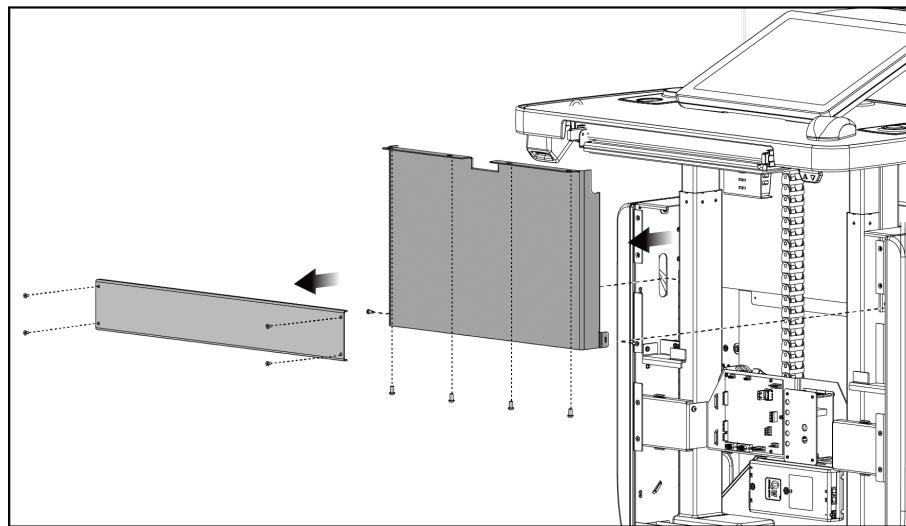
Remove chassis support bracket (left) in order to remove front shroud (center)
